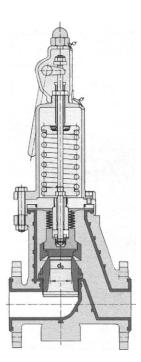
A lined metal-body spring-loaded relief valve Courtesy of Richter Chemie-Technik GmbH
